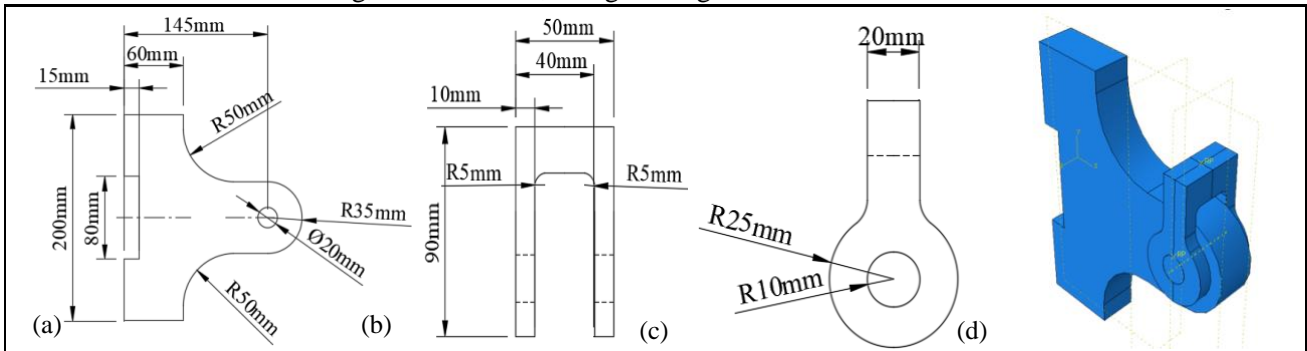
(a) Dimensions of the lug (b) Front view of shackle, (b) Side view of shackle and (d) Assembly of the Lifting Lug System
